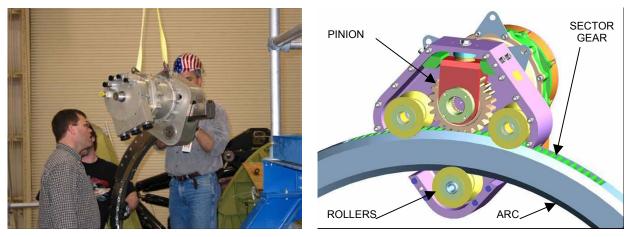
Flap Actuator Assembly Before Installation Figure 6. Arc Pinon Gear Drive Assembly
